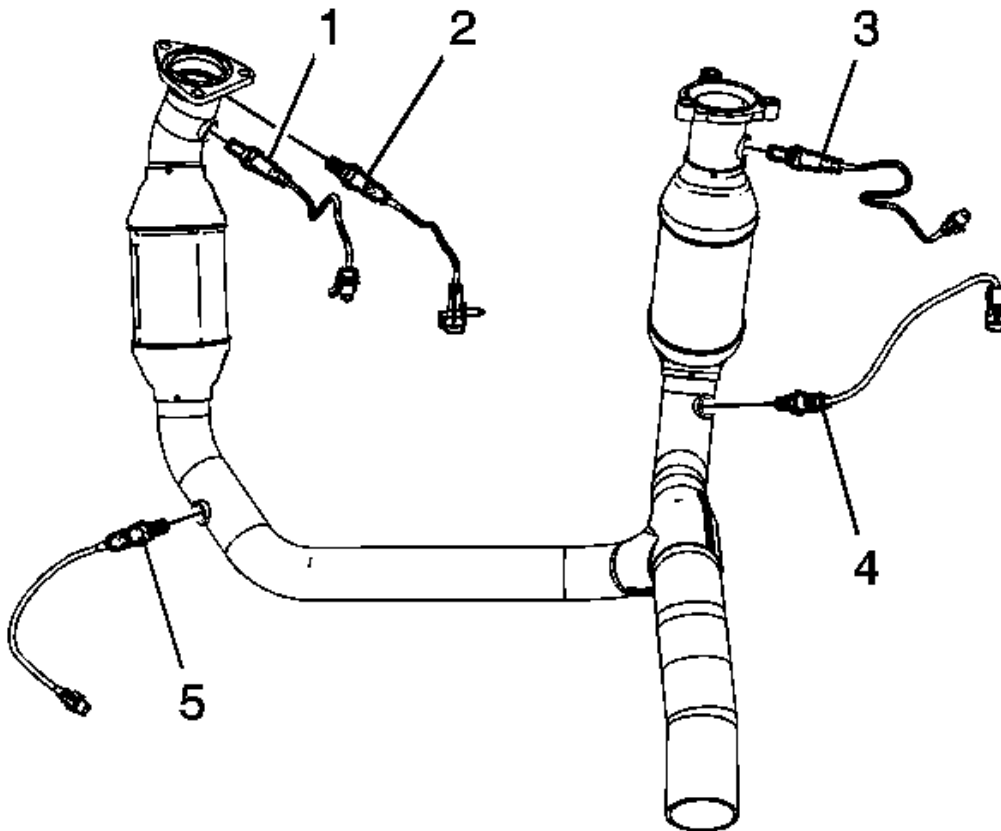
View Of Catalytic Converter Assembly HO2S's
